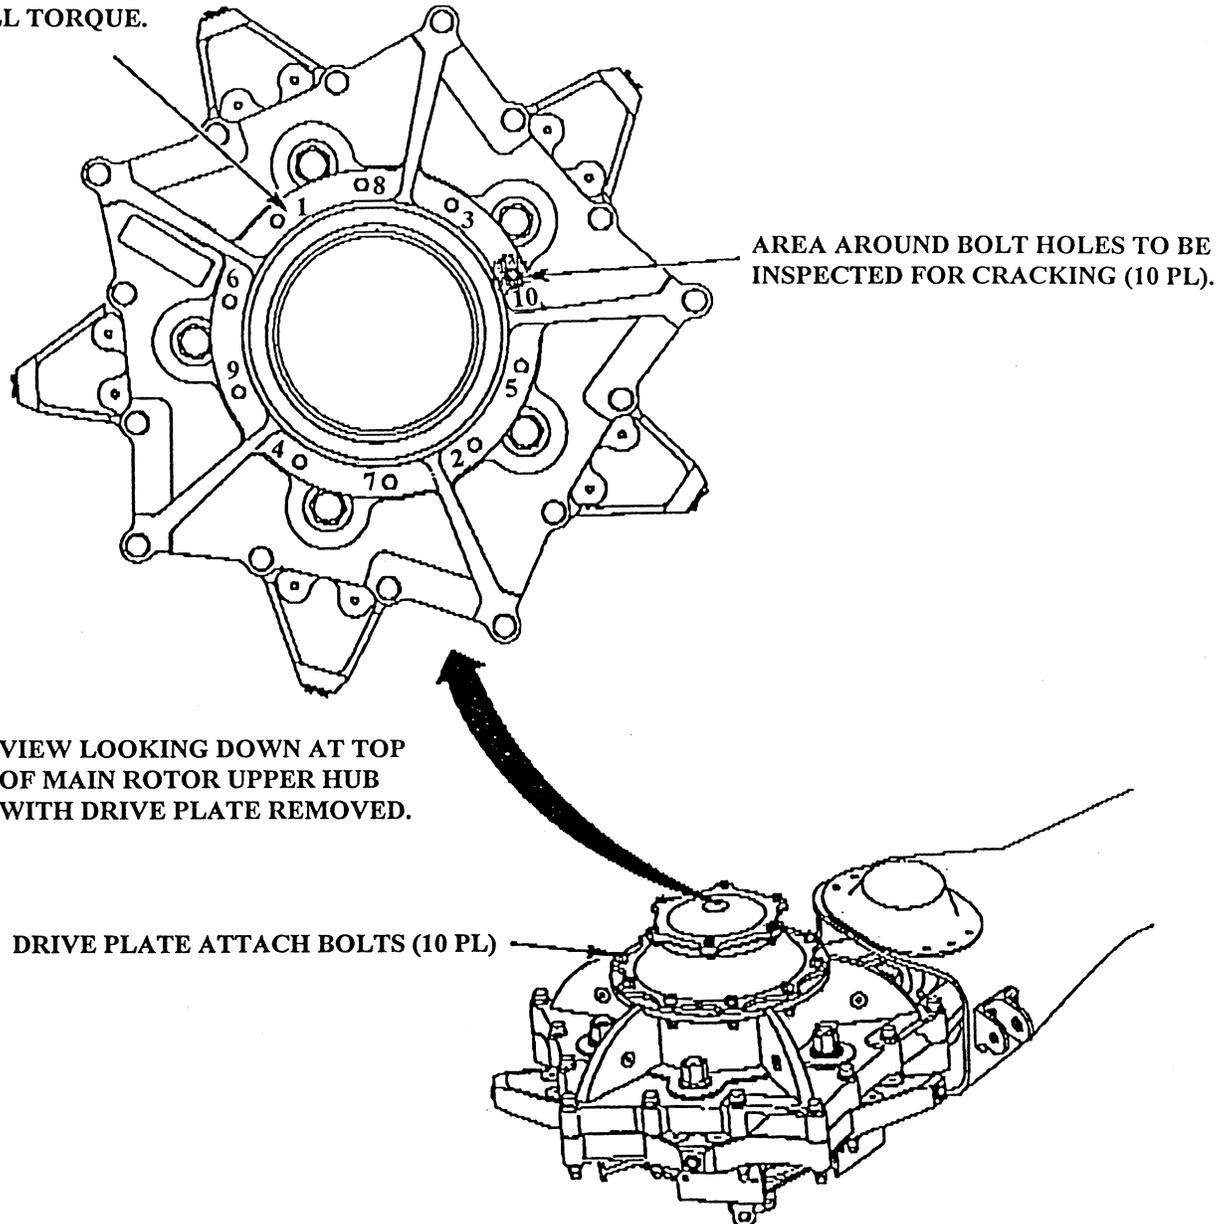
Main Rotor Upper Hub Assembly Inspection.
